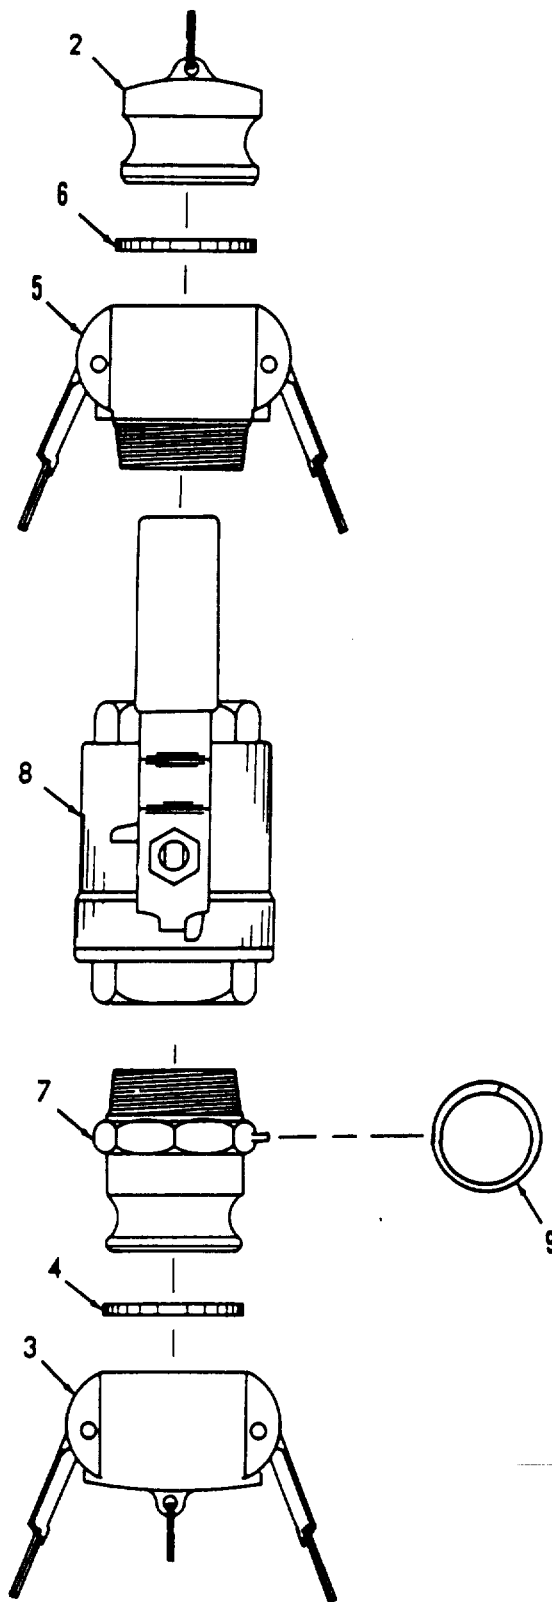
Valve Assembly, 2.00 in., Quick Acting.
